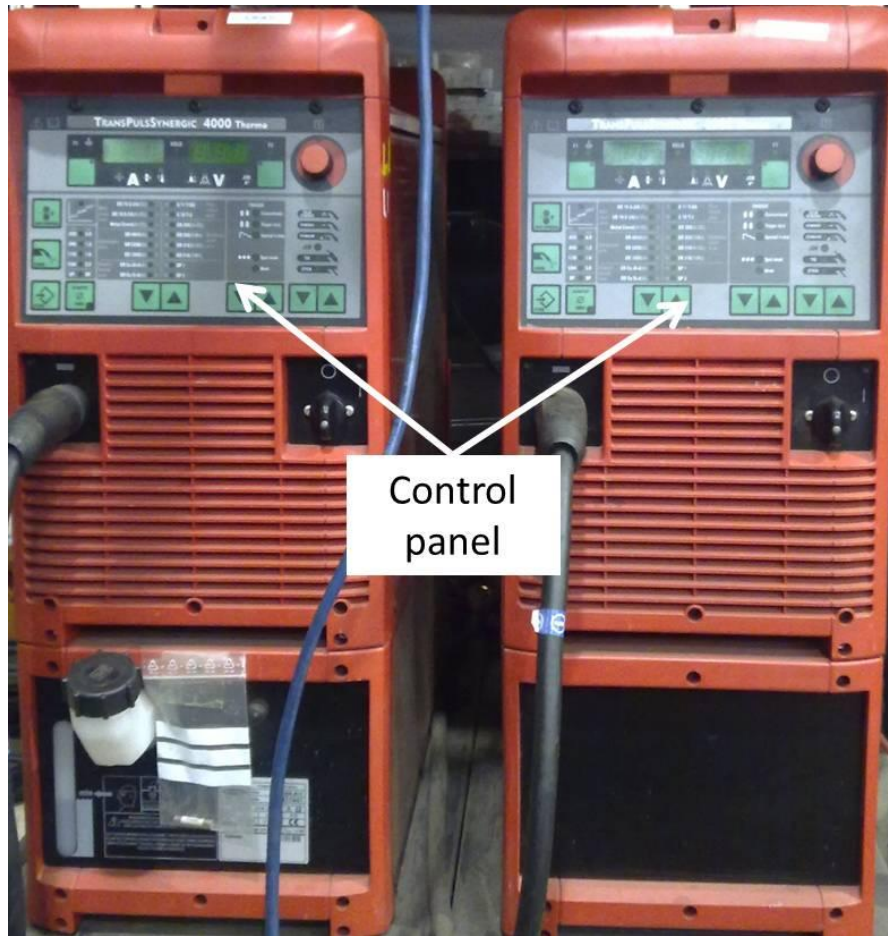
Fronius TPS 4000 thermo power welding machines
